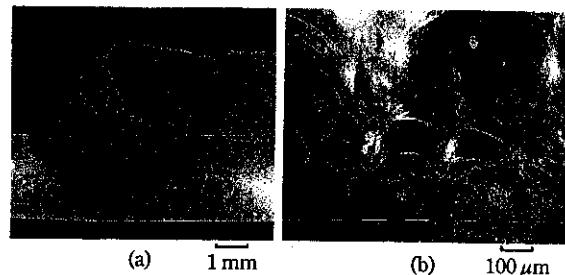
Cross sectional view (a) and inner surface (b) of typical blowhole generated in the lapped MAG welding of zinc coated sheets (45/45 g/m²)
